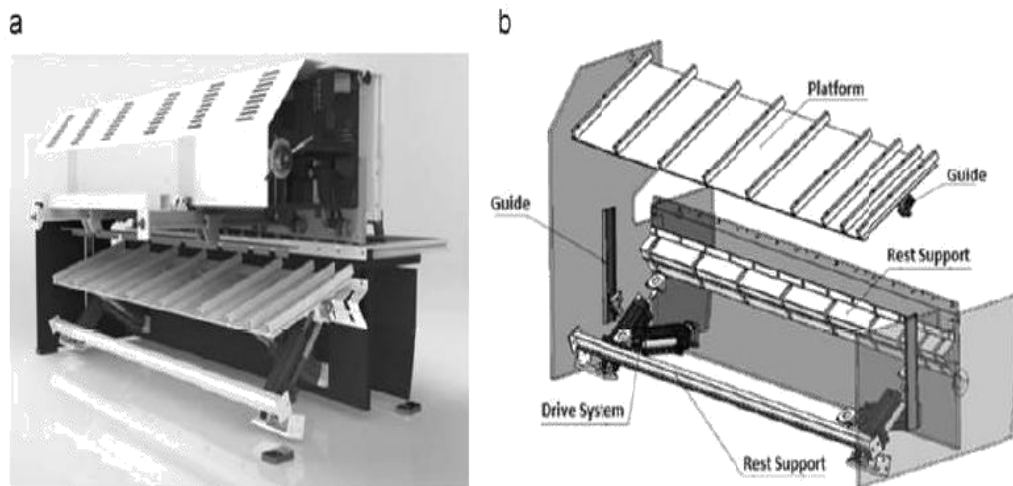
(a) Isometric view and (b) exploded view of preliminary holder version (Courtesy of L.M.B. Araújo et al.)
